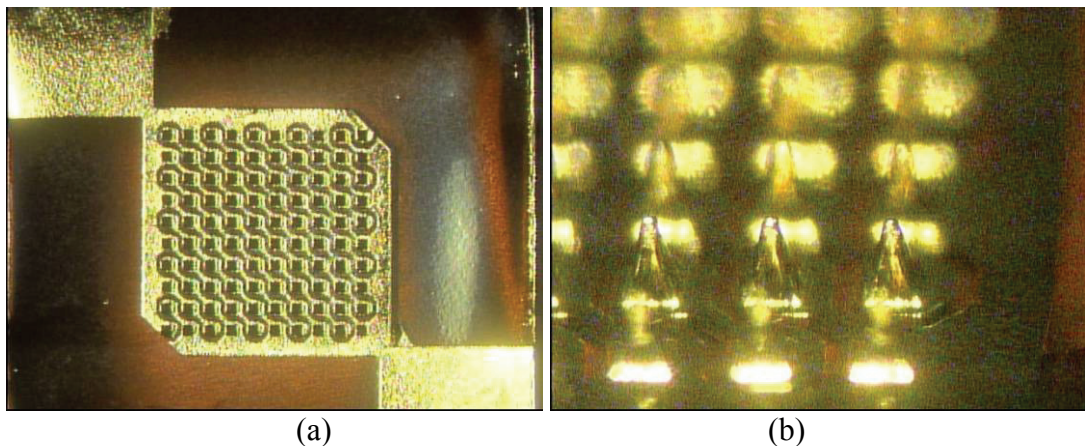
Optical micrographs of the molded structure. The metal layer was successfully transferred to the molded material; (a) top view, and (b) side view
